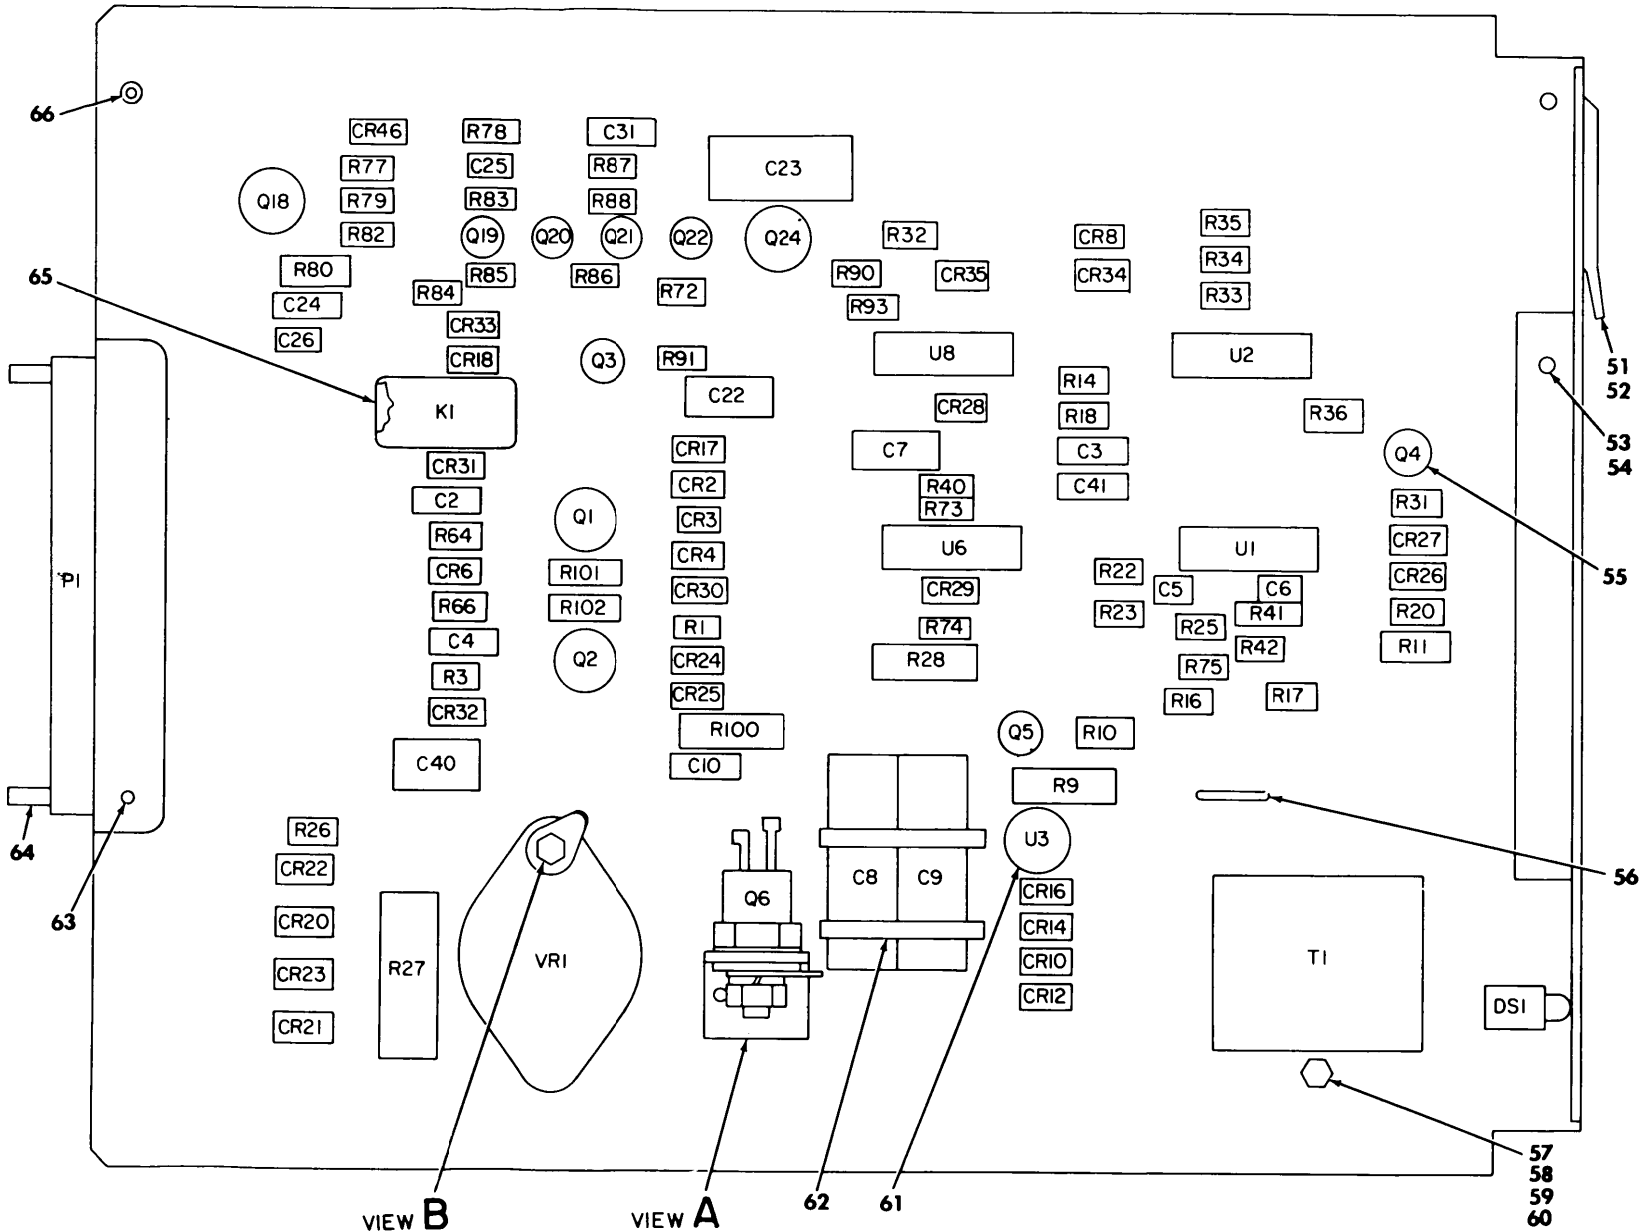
Circuit card assembly, multi Vdc, A1 (sheet 3 of 3)
